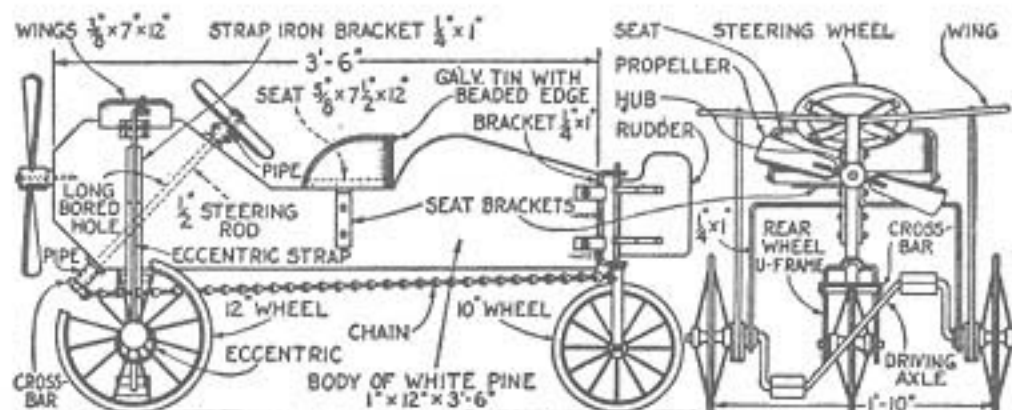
Side and front views of the auto-plane with suitable dimensions; these could be changed, however, to suit the size of the rider, and the wings could be stationary.
